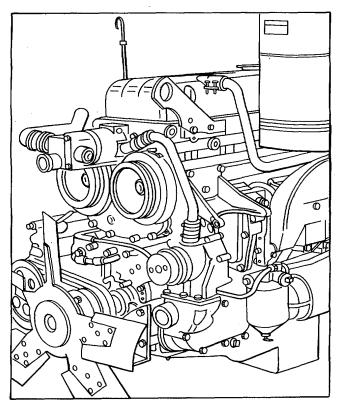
Crankshaft-Driven Fan Mounting (In-Line Engine
